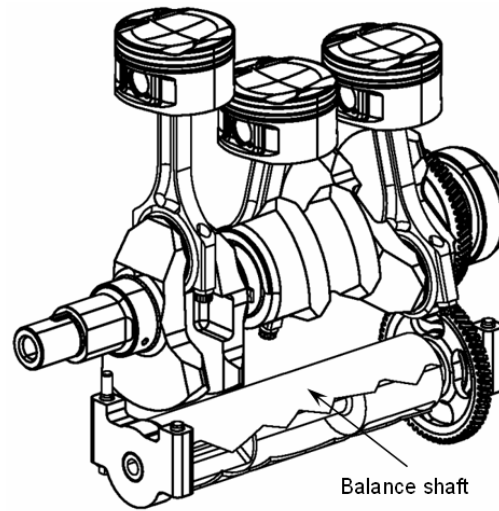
Cranktrain and balance shaft arrangement of the Sabre engine. The shallow bowl visible in the piston crown is used for spray containment at start-up. Also visible is the shroud around the balance shaft to reduce crankcase windage. (Illustration courtesy Lotus Engineering)
